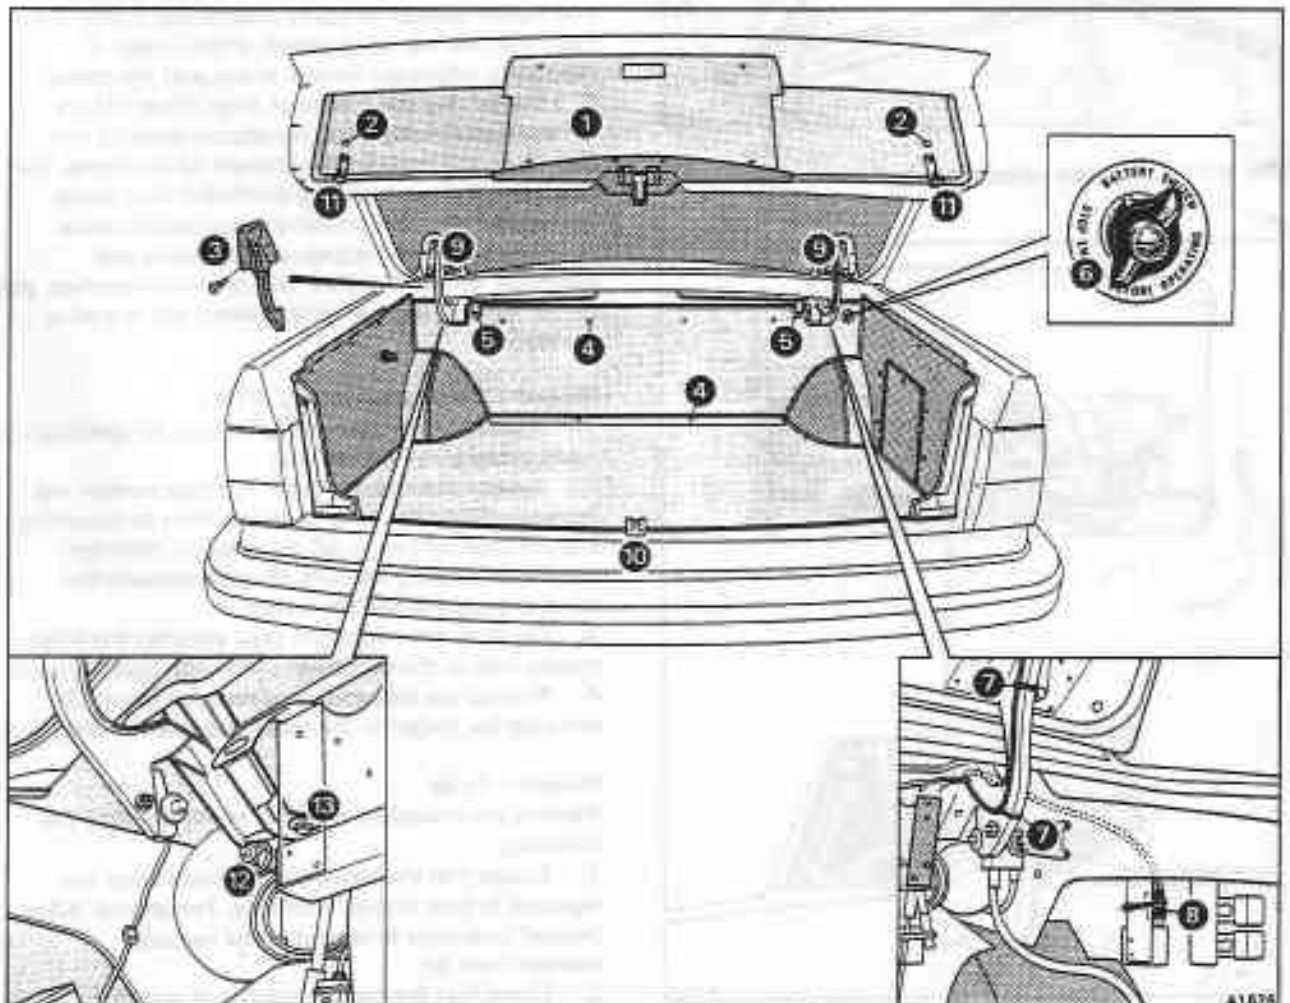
Luggage compartment lid trim and hinge mounting arrangement
